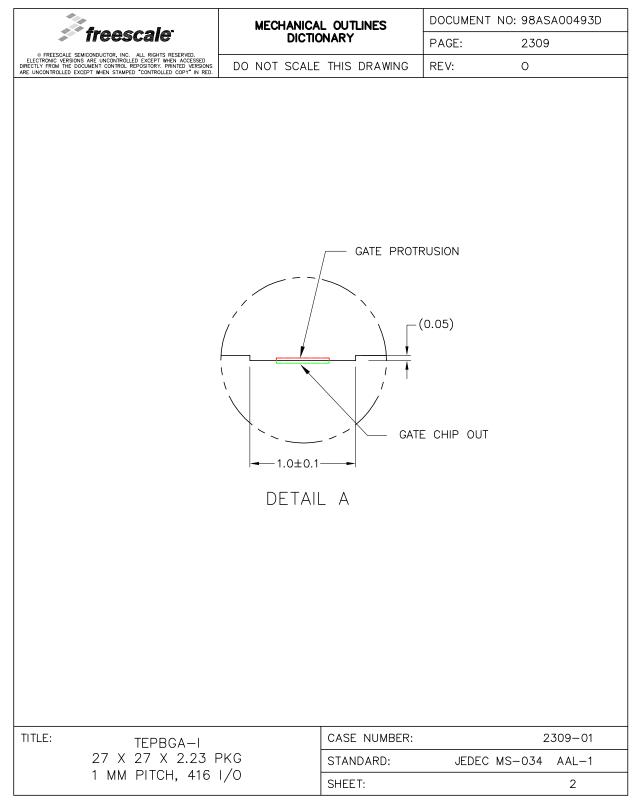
416 TEPBGA (emulation) package mechanical drawing (Sheet 2 of 3)
